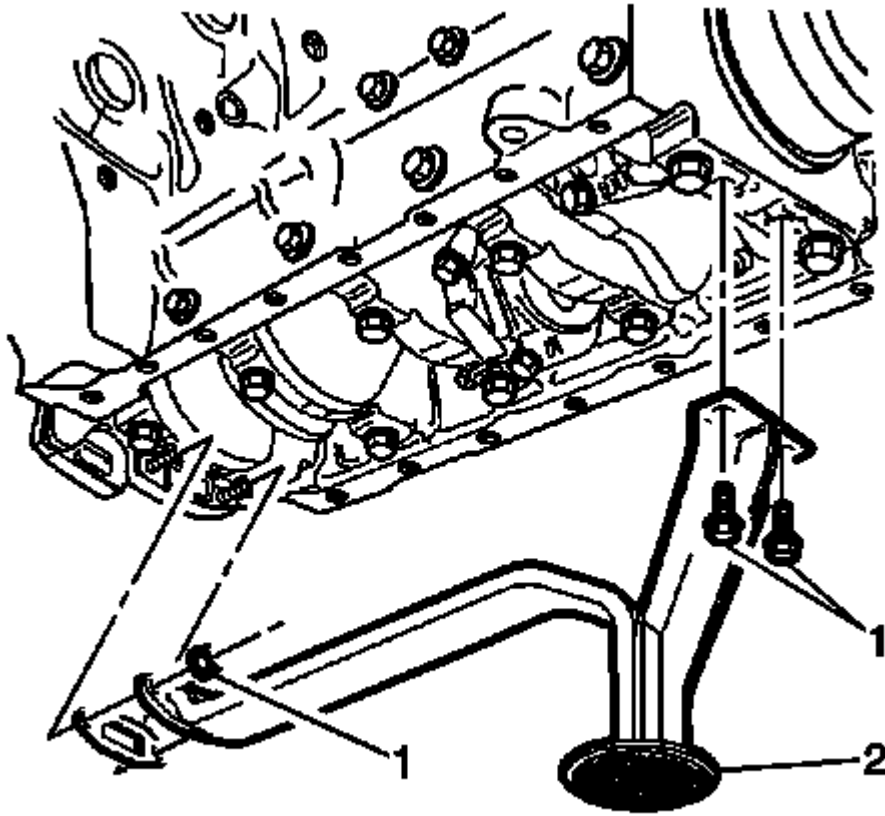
View Of Oil Pump Screen, Bolts, Nuts & Gasket
